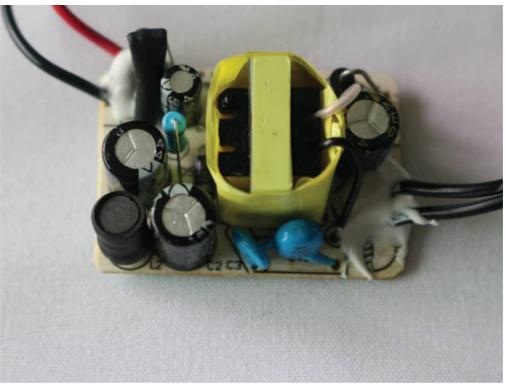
Component side view of RKPO-zzxxxyyyy-D1 (after removed glue)
